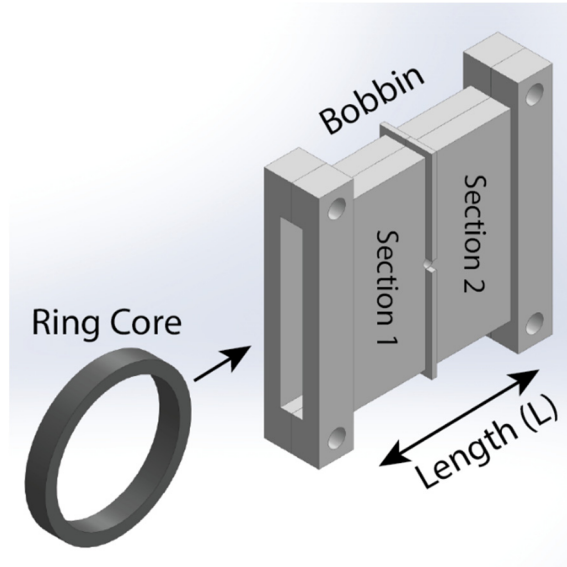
Sensor axis constructed from a ferromagnetic ring core with a toroidal drive winding inserted in a bobbin which supports the combined sense/feedback windings.
